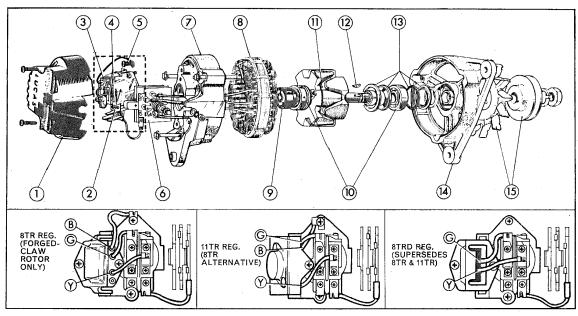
(c) Machine-sensing system, 15ACR, 16ACR and 17ACR alternators (reference Fig. 2 and 6)
